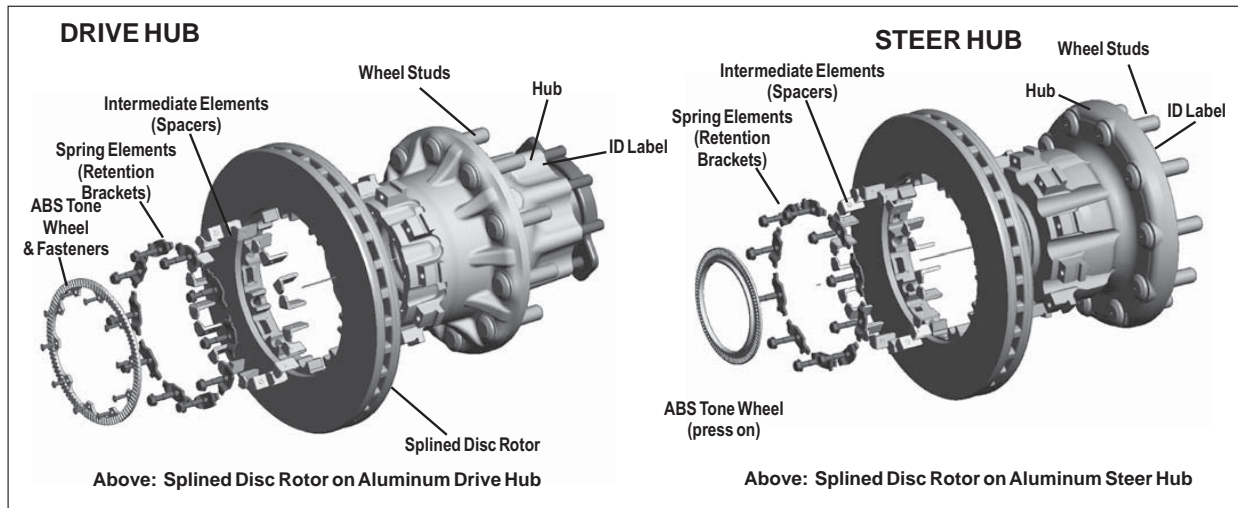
SPLINED DISC ROTOR EXAMPLES - EXPLODED VIEWS
